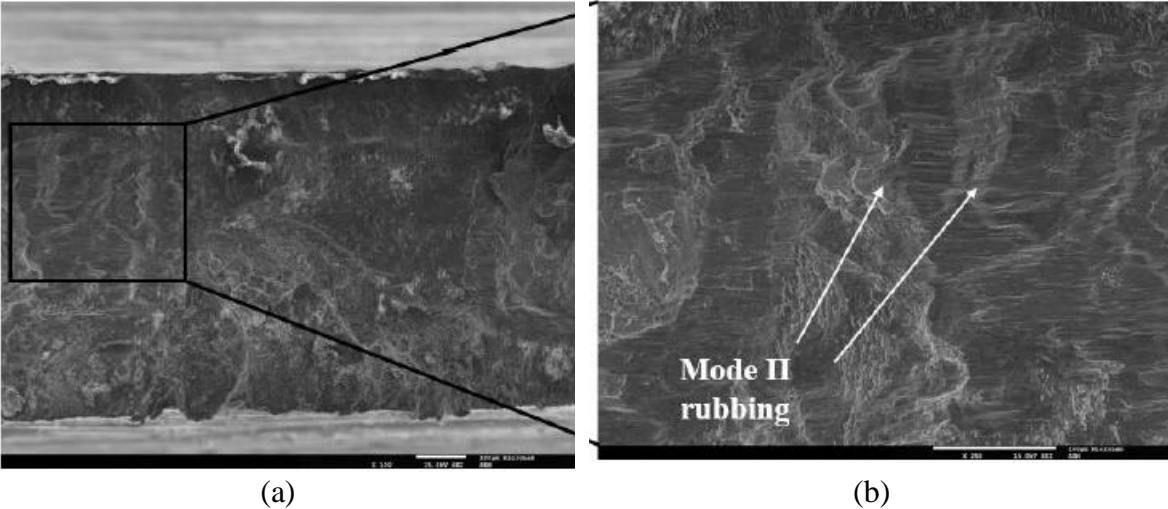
C-T specimen: (a) fatigue crack surface; (b) mode II shear rubbing marks.
